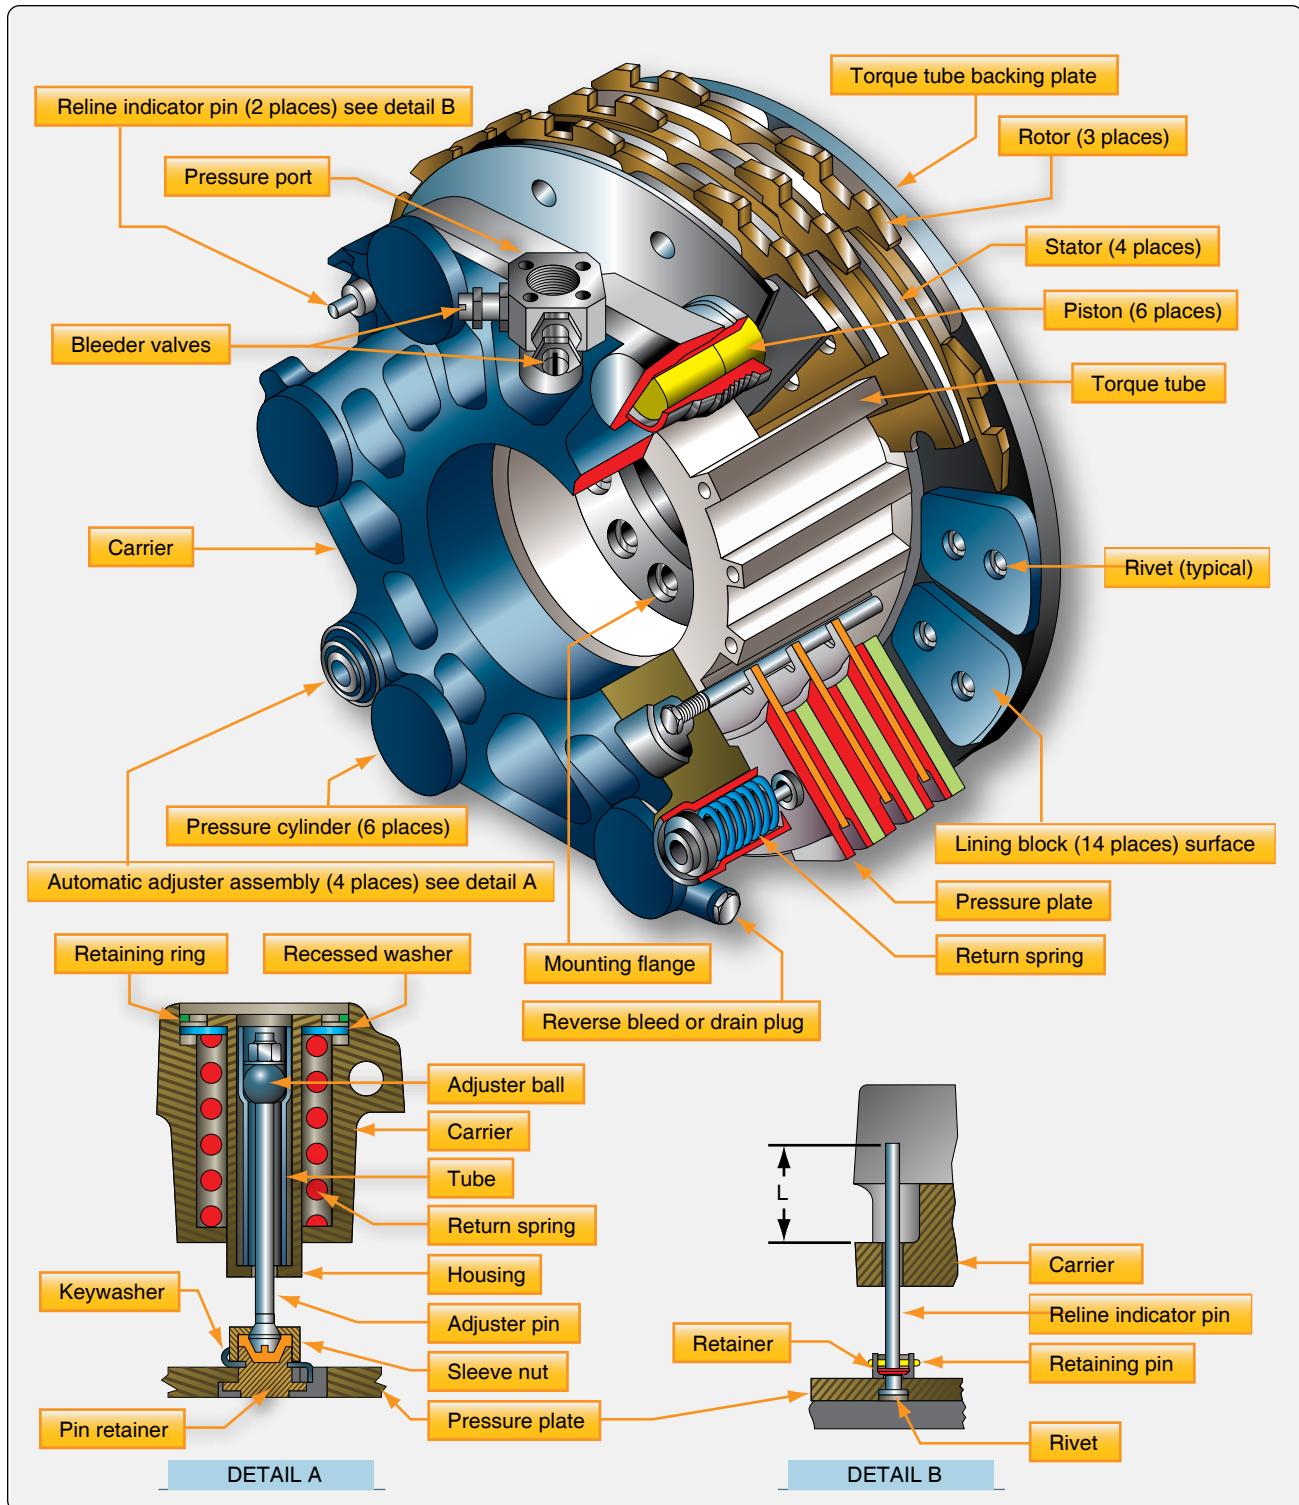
The multiple-disc brake assembly and details from a Boeing 737.
